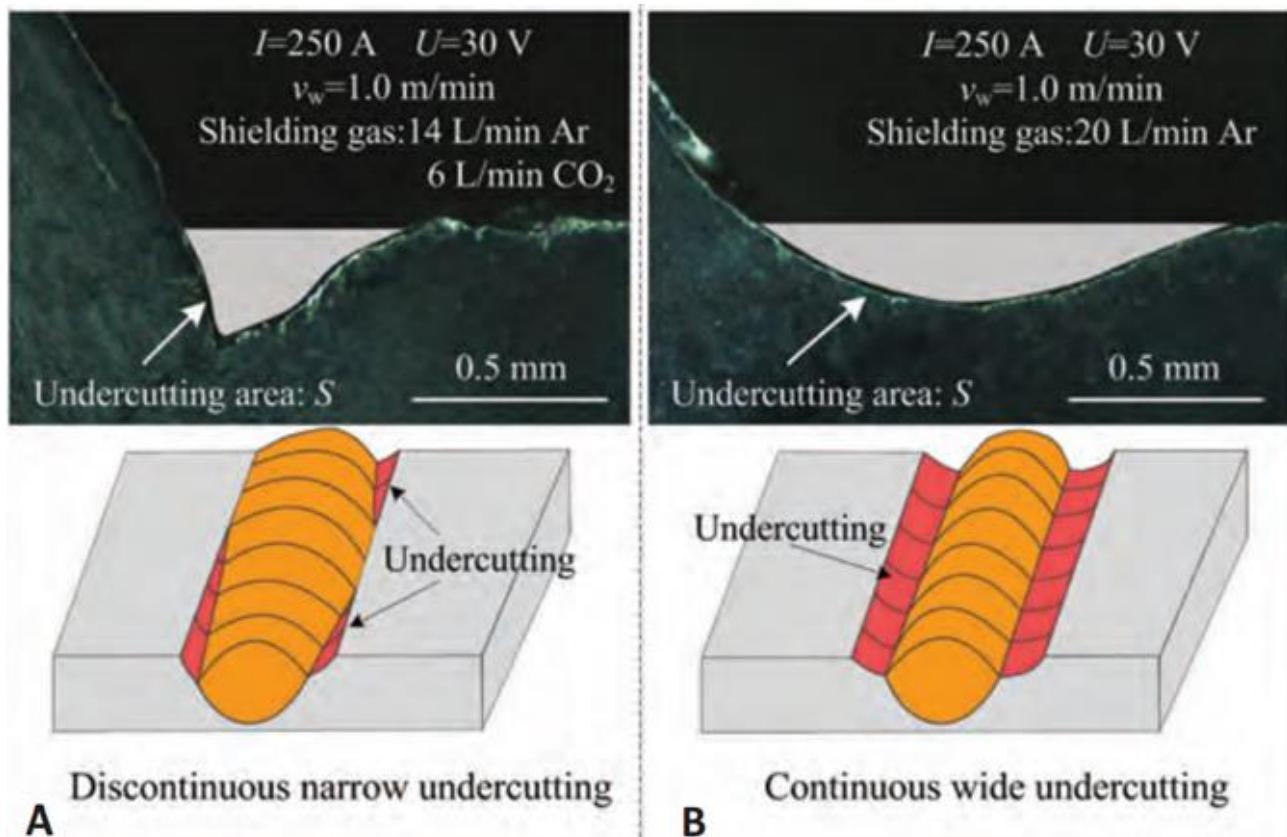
Two different undercut discontinuities formed in butt weld joints made with gas metal arc welding
